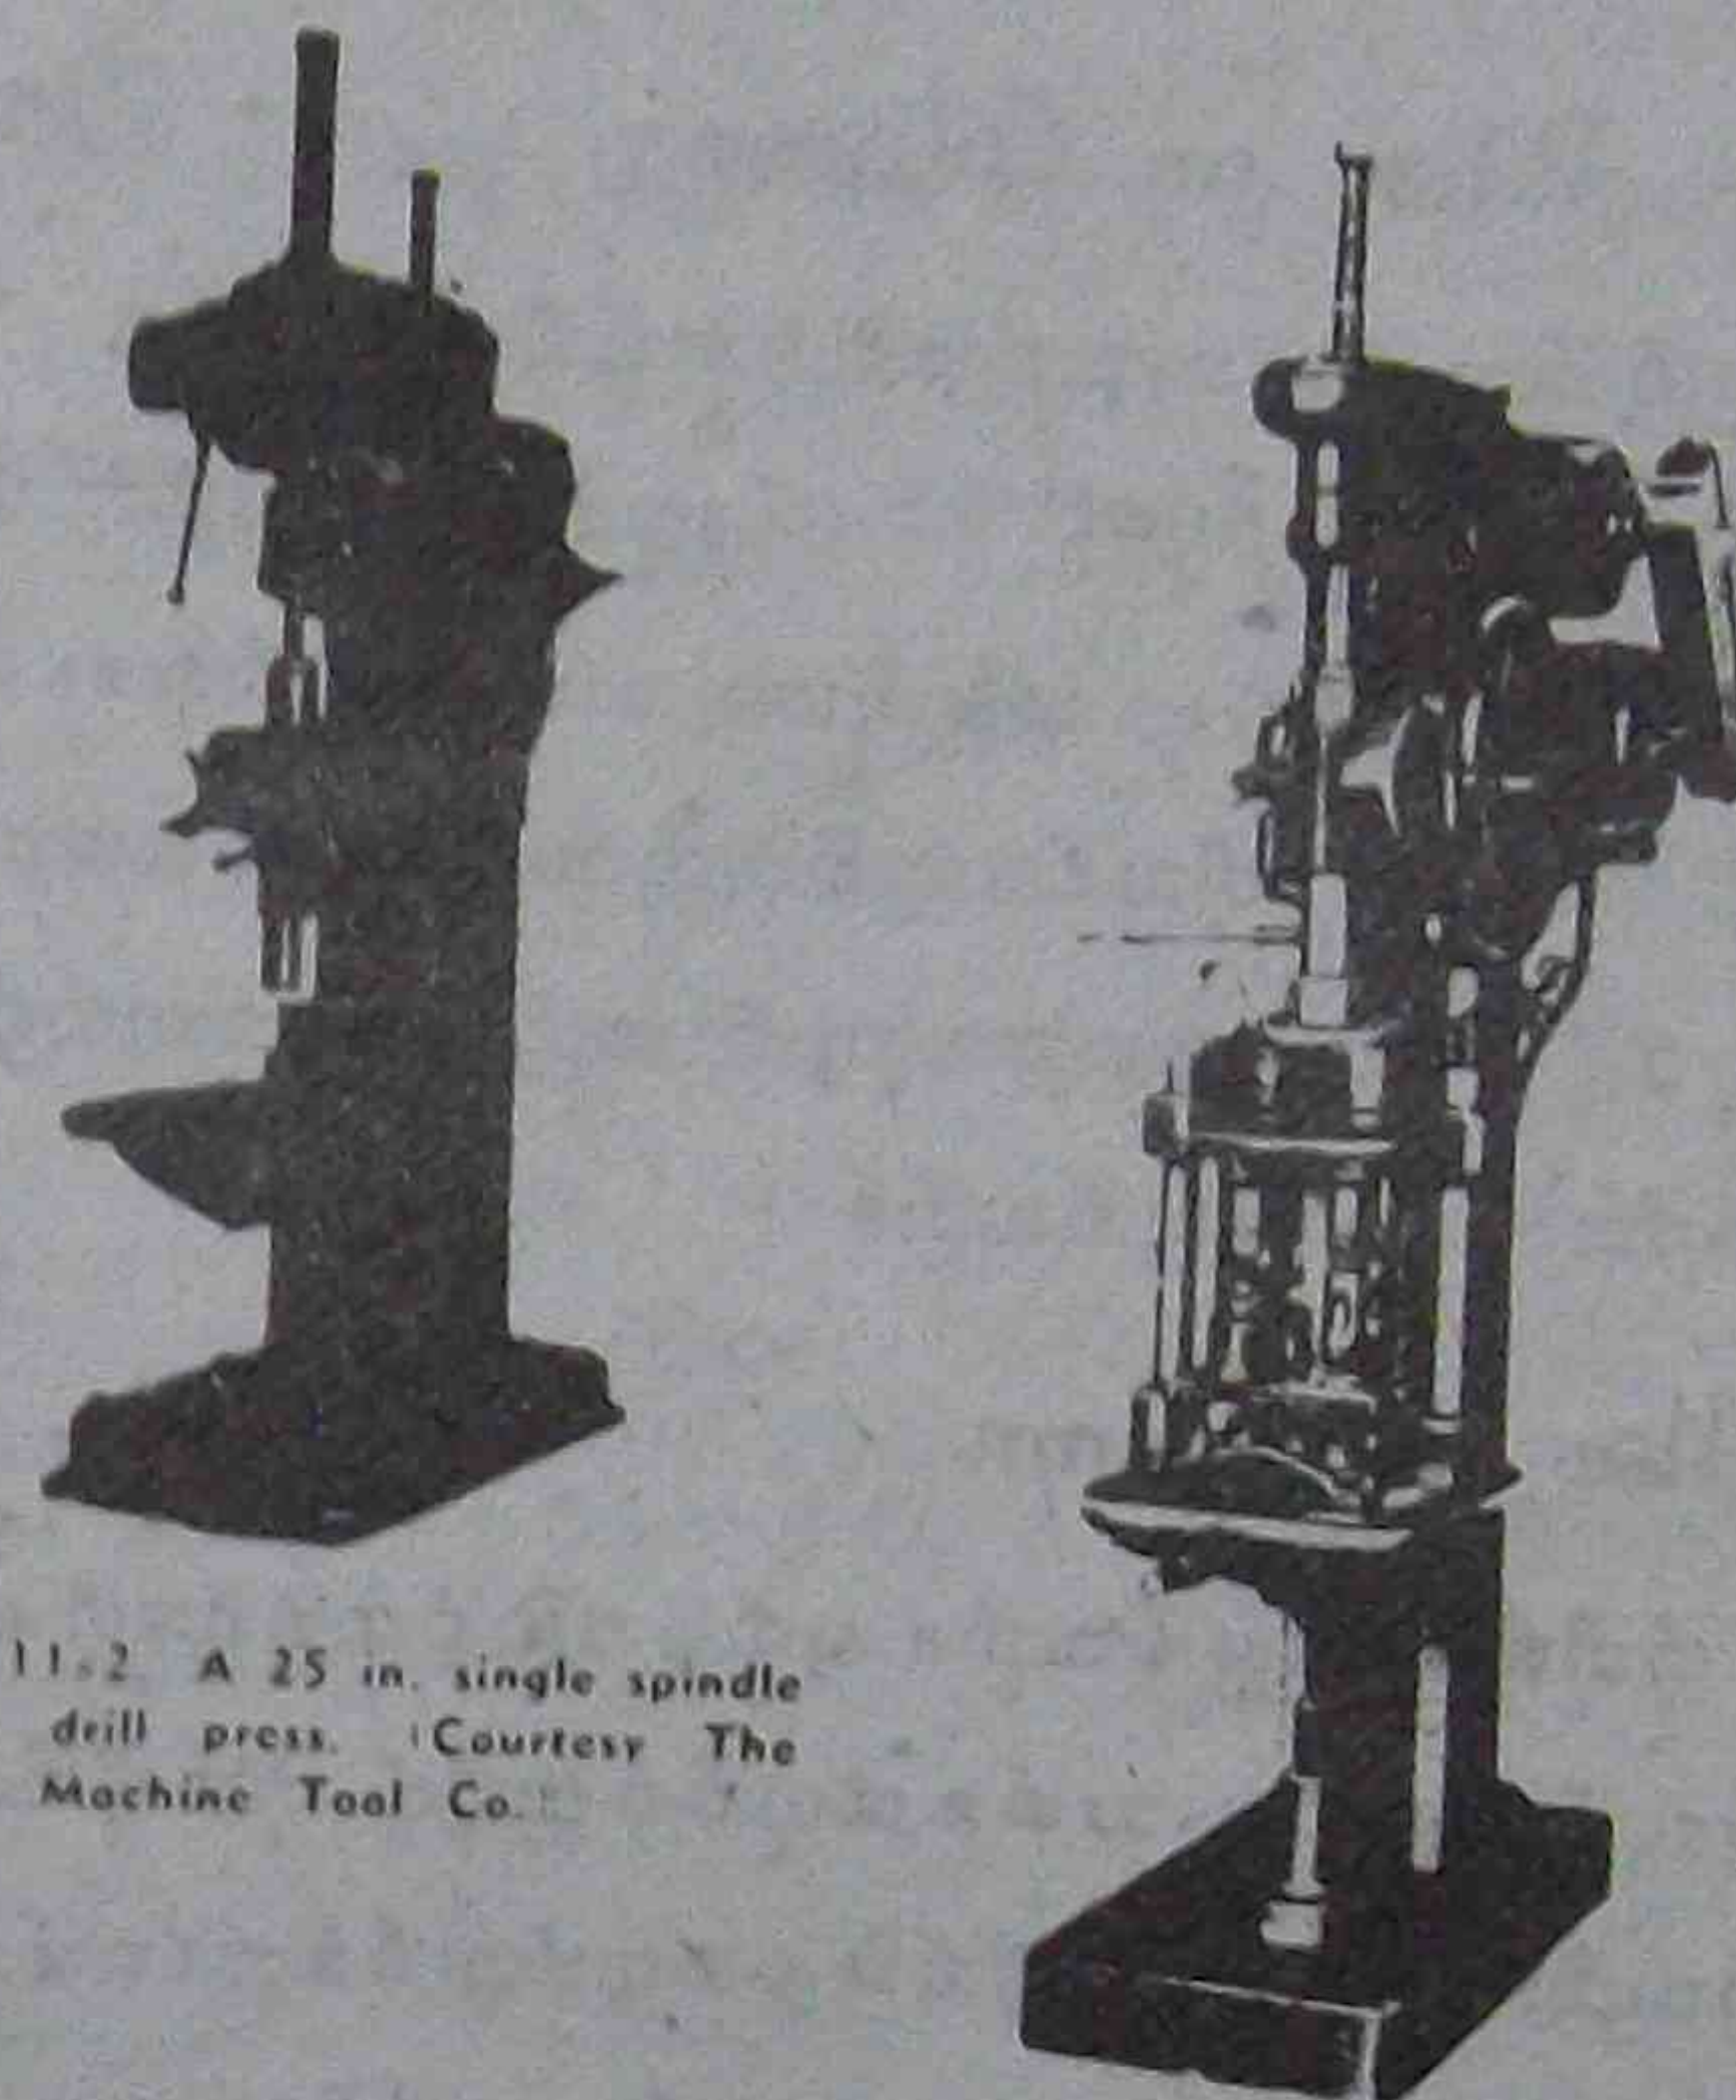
A 25 in. single spindle upright drill press. (Courtesy The Fostick Machine Tool Co.)
